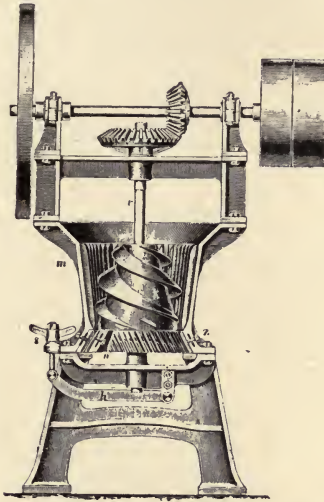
Section of Heinen's Peat Mull Grinding Machine.
